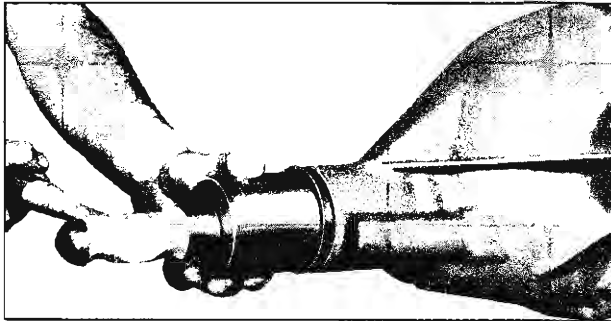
Drive Pinion Flange Oil Seal Installation (Heavy-Duty)
